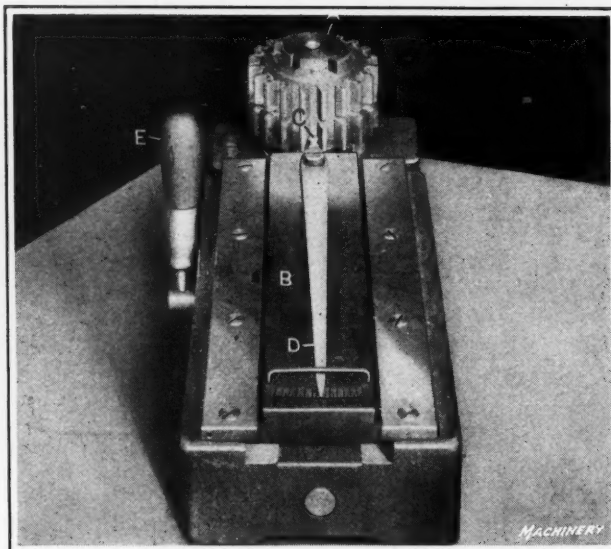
Fixture for testing Relationship between Position of Keyway and Gear Teeth in Crankshaft Sprockets. Limits of Tolerance,  $\pm 20$  Minutes
